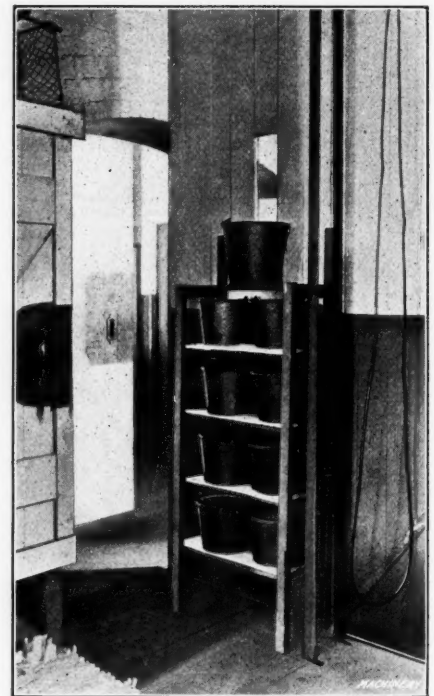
Fire Doors separate Departments and Sand Pails are provided where Oil or Japan is used
